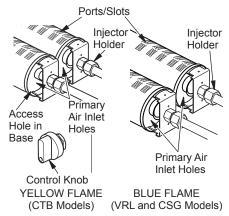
Injector Holder On Outlet Burner Tubes - Front and Middle Burners
